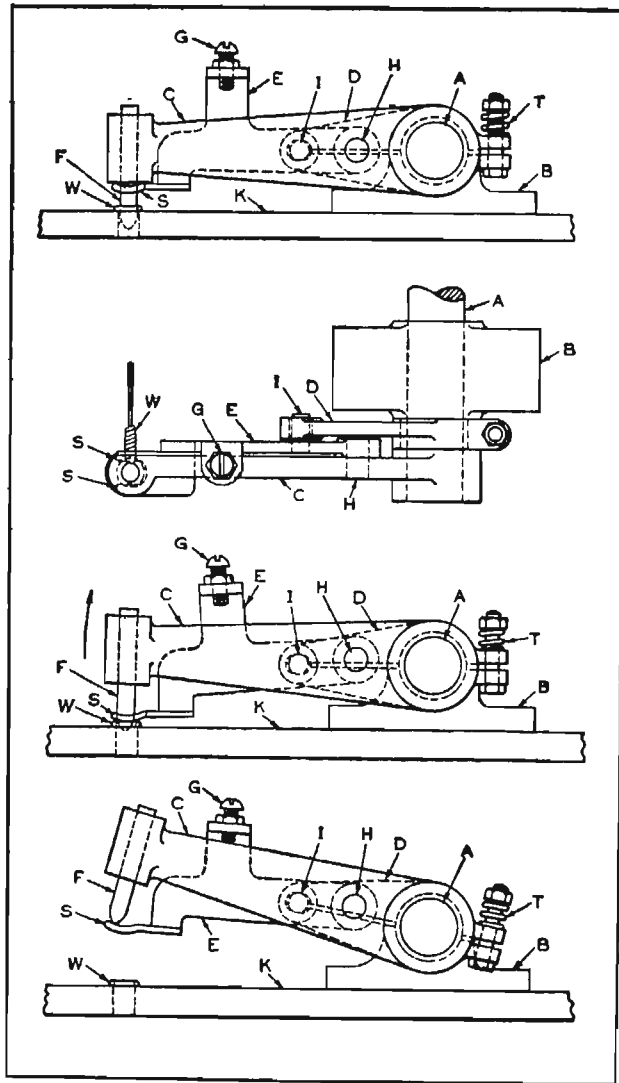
(Top) Stripper Mechanism for Wire-forming Machine with Wire W Twisted around Mandrel F. (Center) Stripper Fingers about to Strip Wire W from Pin F. (Bottom) Mechanism with Pin F and Stripper Fingers S Raised to their Highest Points.
